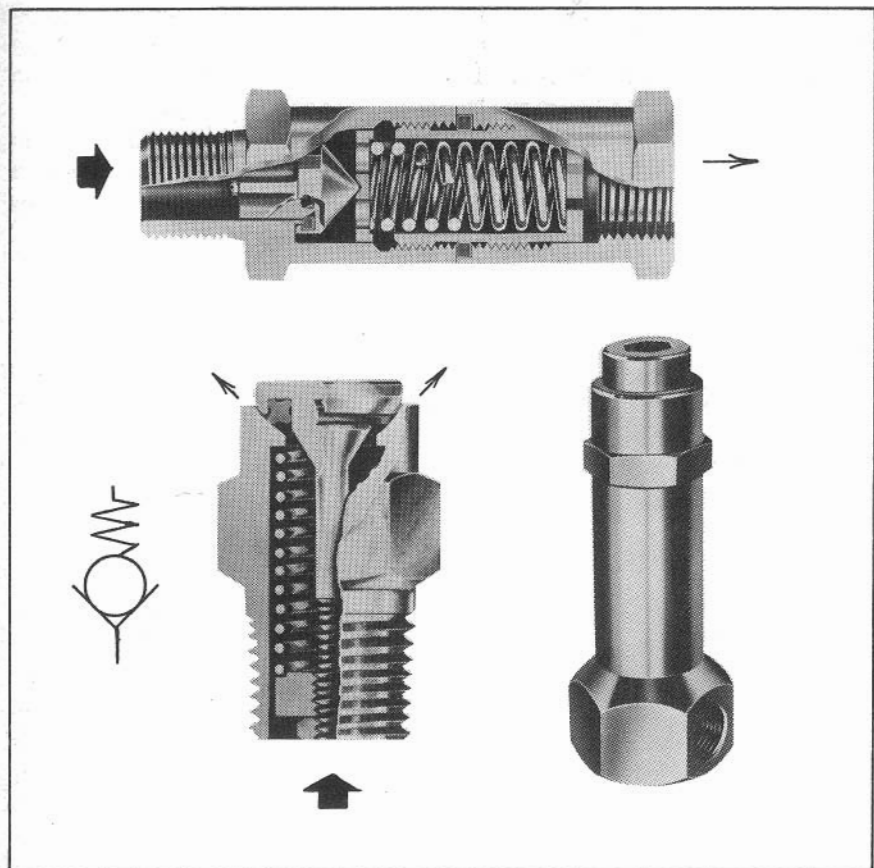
Relief valves. Courtesy of CIRCLE SEAL CONTROLS
